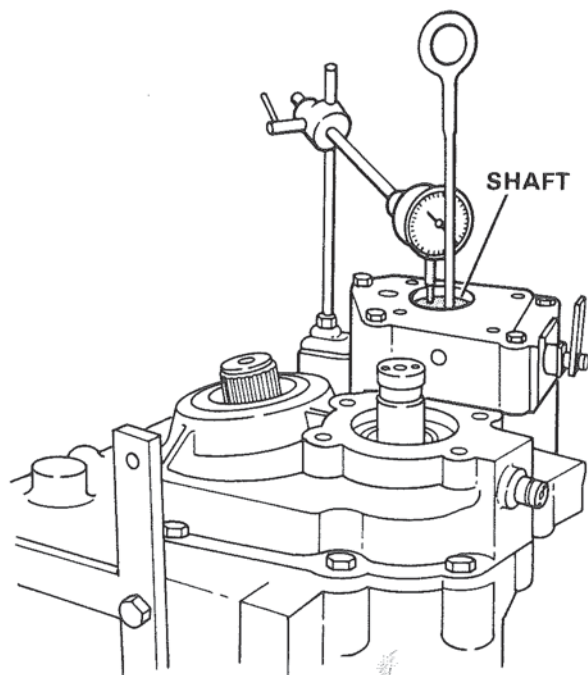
Dial Indicator Mounted for End Play Check-Reverse Clutch Shaft.
